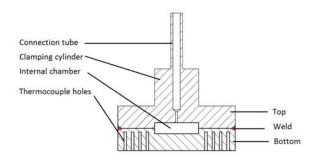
Test part consisting of a top and bottom half welded together.
